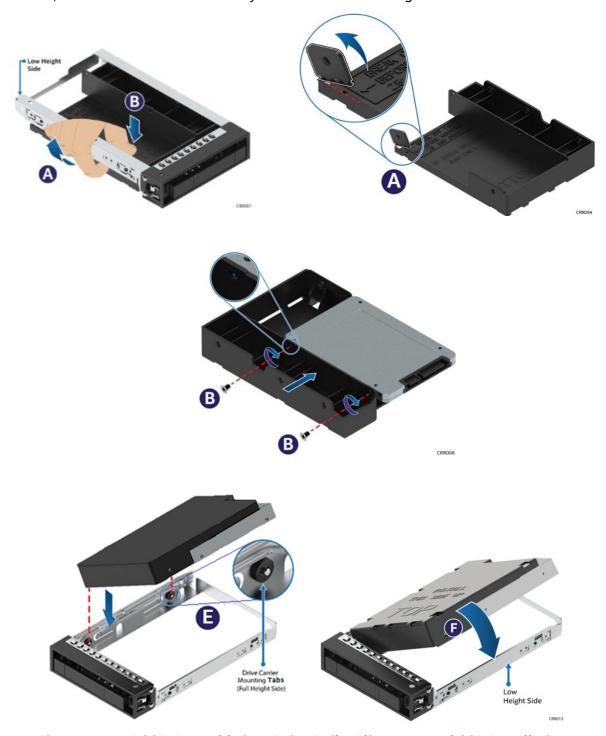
2.5" SSD Assembly into Drive Rail – Alignment and SSD Installation
